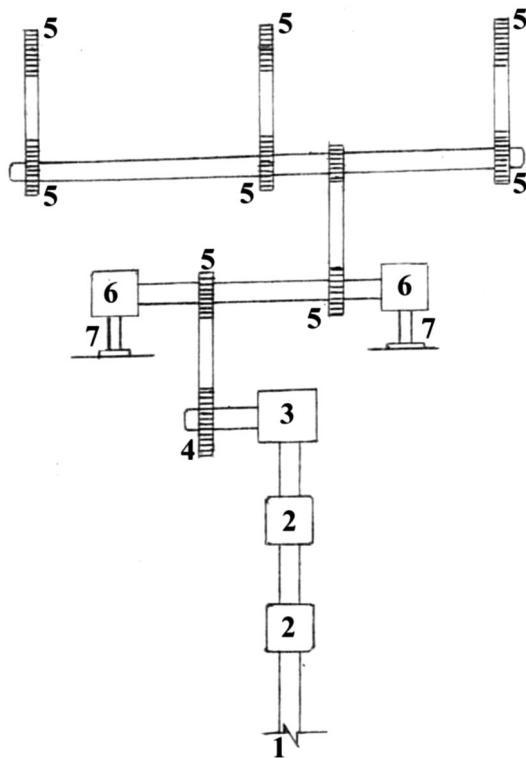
Schematic view of power transmission mechanism of developed sugarcane-cum-potato planter. 1 Power from PTO shaft, 2 universal joint cross, 3 reduction gear box (15:1), 4 chain-sprocket (24 T), 5 chain-sprockets (16 T), 6 bevel gear box (1:1.8), 7 power to sugarcane sett cutting blades
